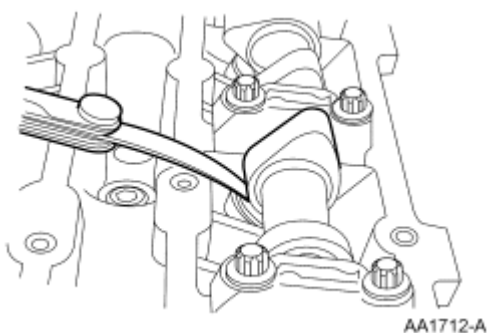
Measuring Each Valve's Clearance Using A Feeler Gauge
